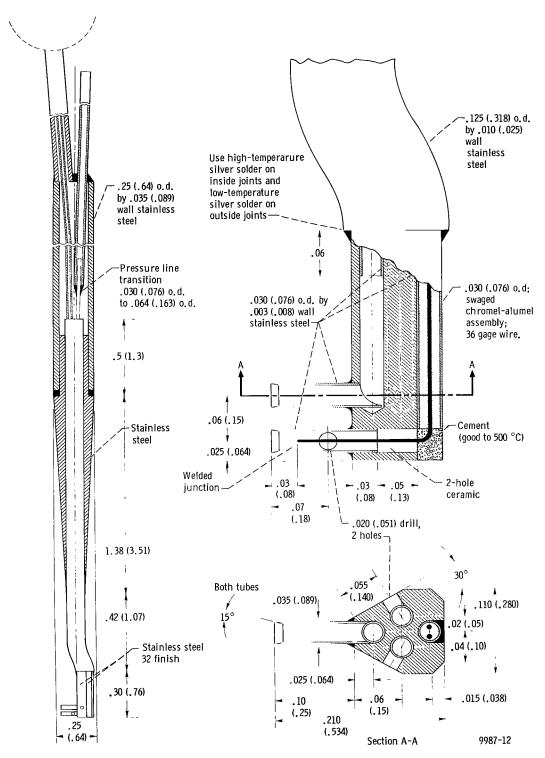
Probe detail. Linear dimensions are in inches (cm).
